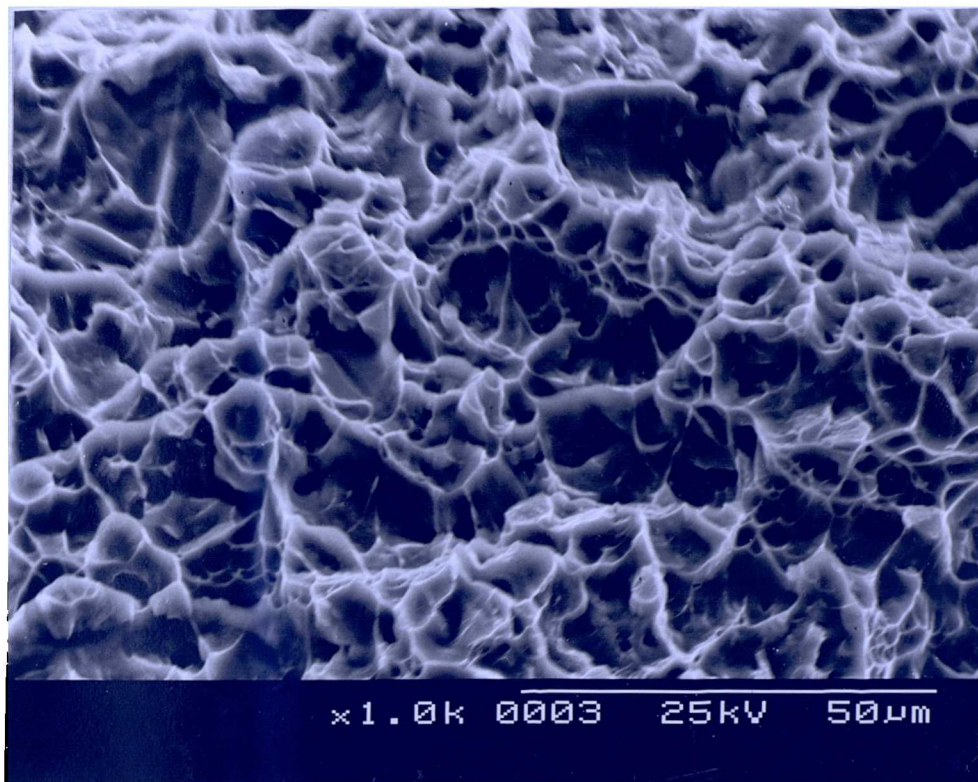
Fracture Surface Of Weak Weld (α : 0.92 mm, f = 100 Hz, P_{fr} : 50.5 MPa -experiment D16)
